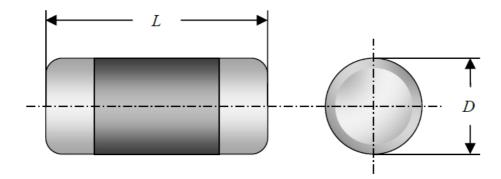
Shape and dimensions of cylindrical (RC) resistors
